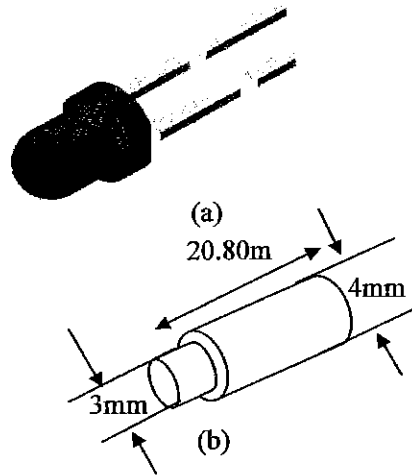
(a) Dimension for the sensor; (b) dimension inside the sensor jig for each sensor.
